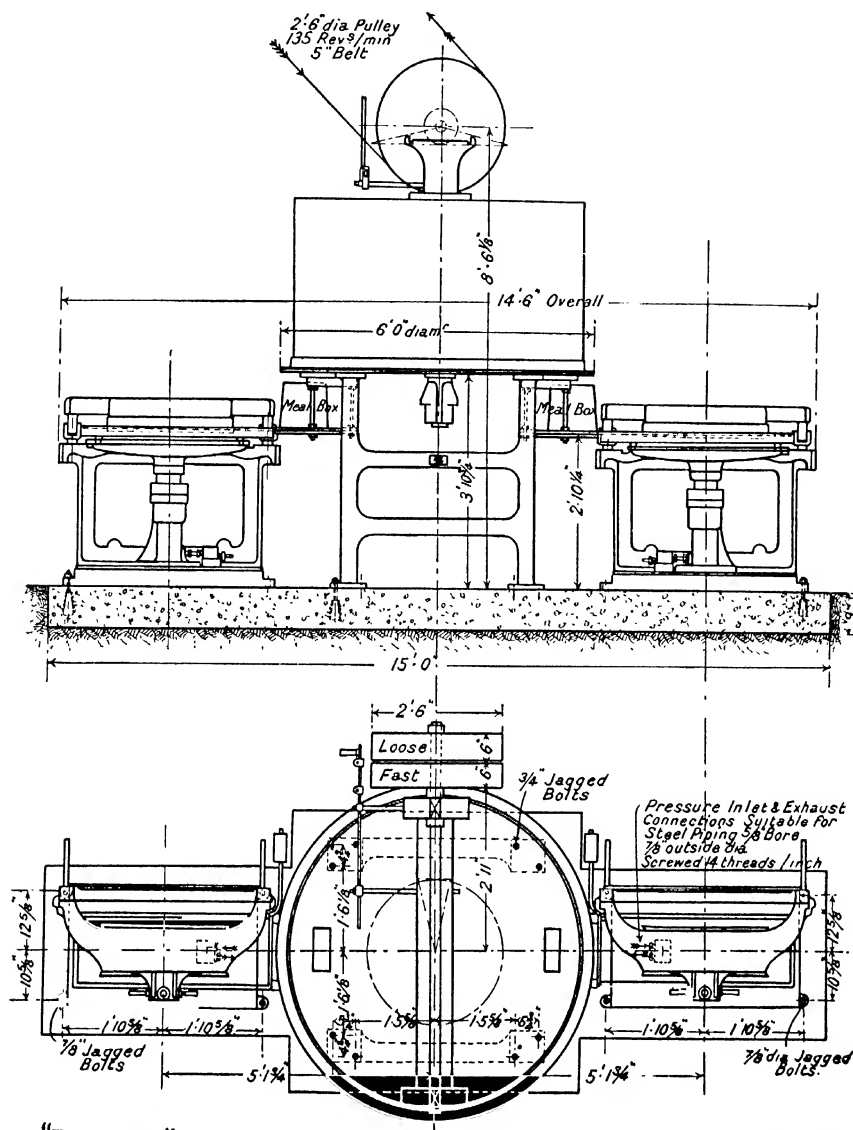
Kettle and Moulding Machine—Robert Middleton.
